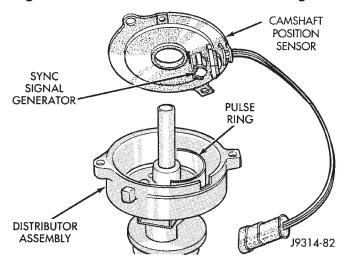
Camshaft Position Sensor—Typical (5.2L Distributor Shown)
